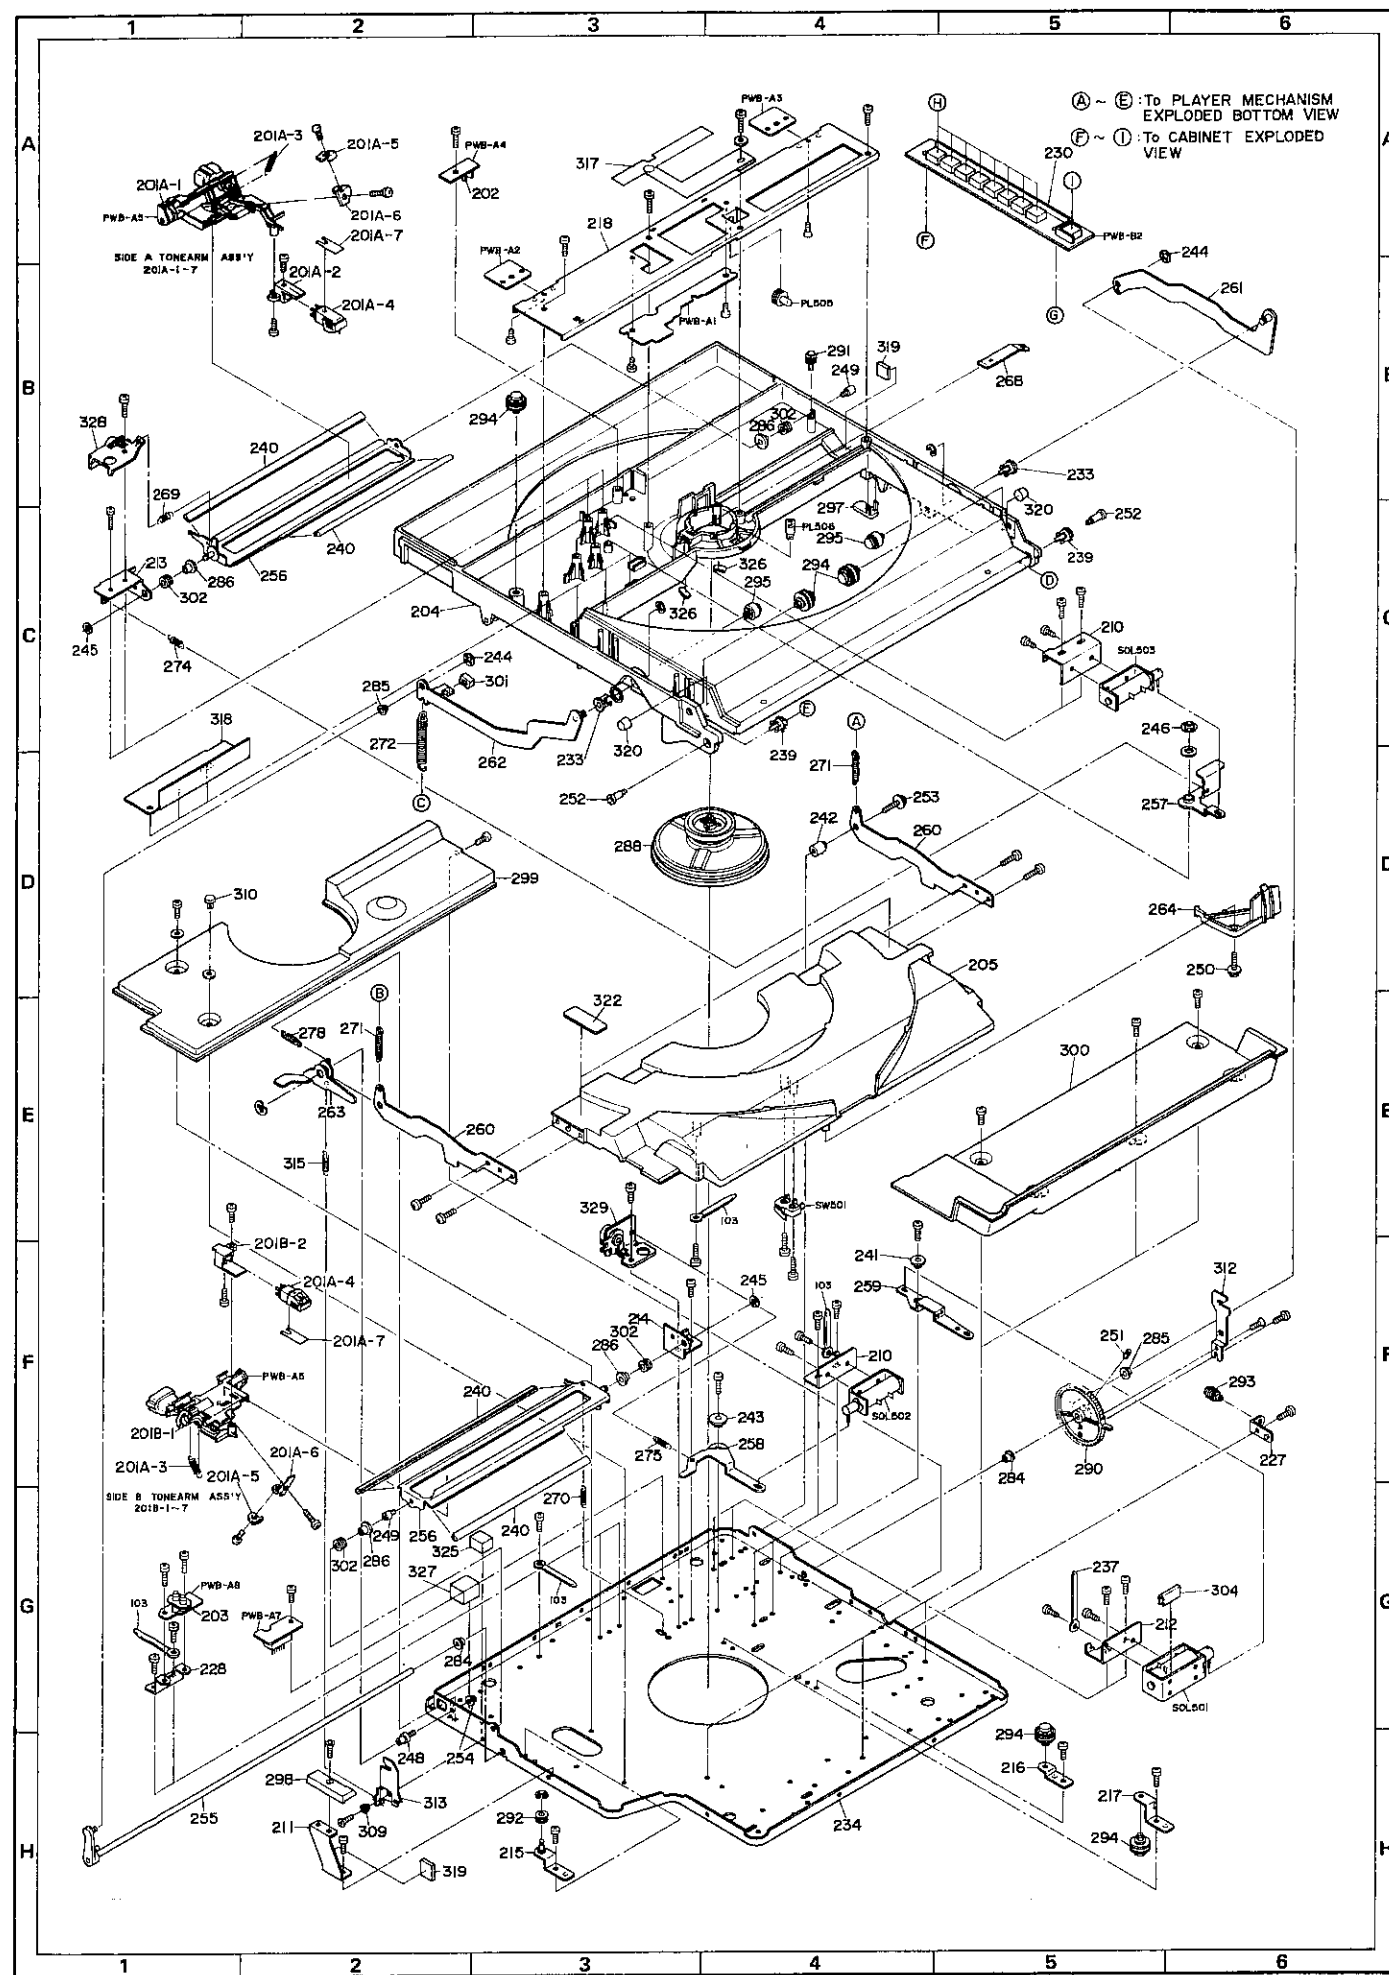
PLAYER MECHANISM EXPLODED TOP VIEW
